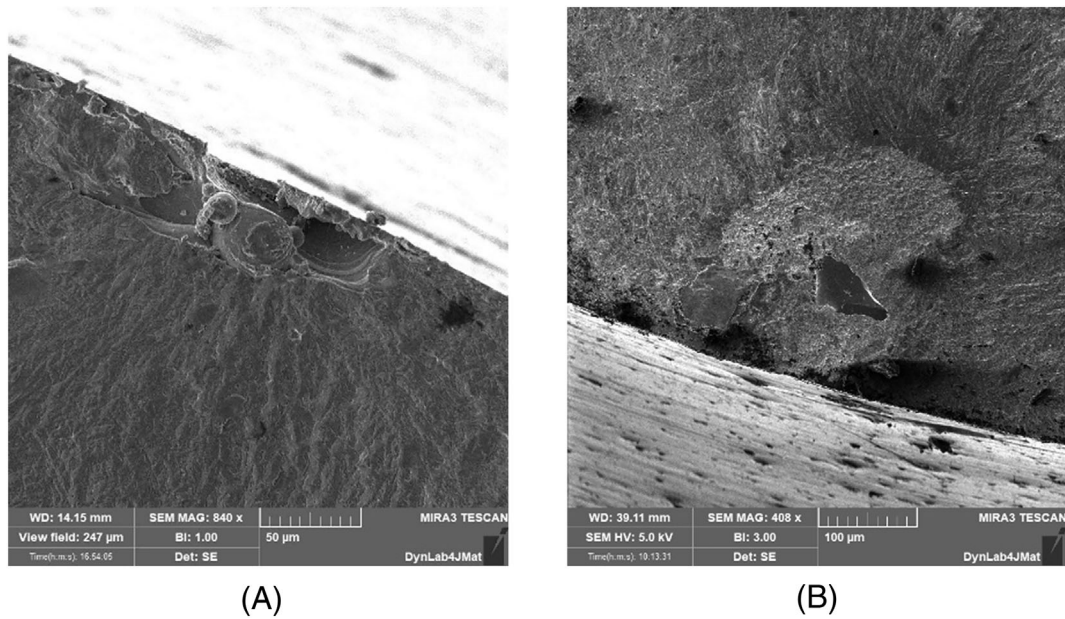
Fracture surface morphology: (A) failure from defect and (B) failure from defects with fish-eye morphology.
